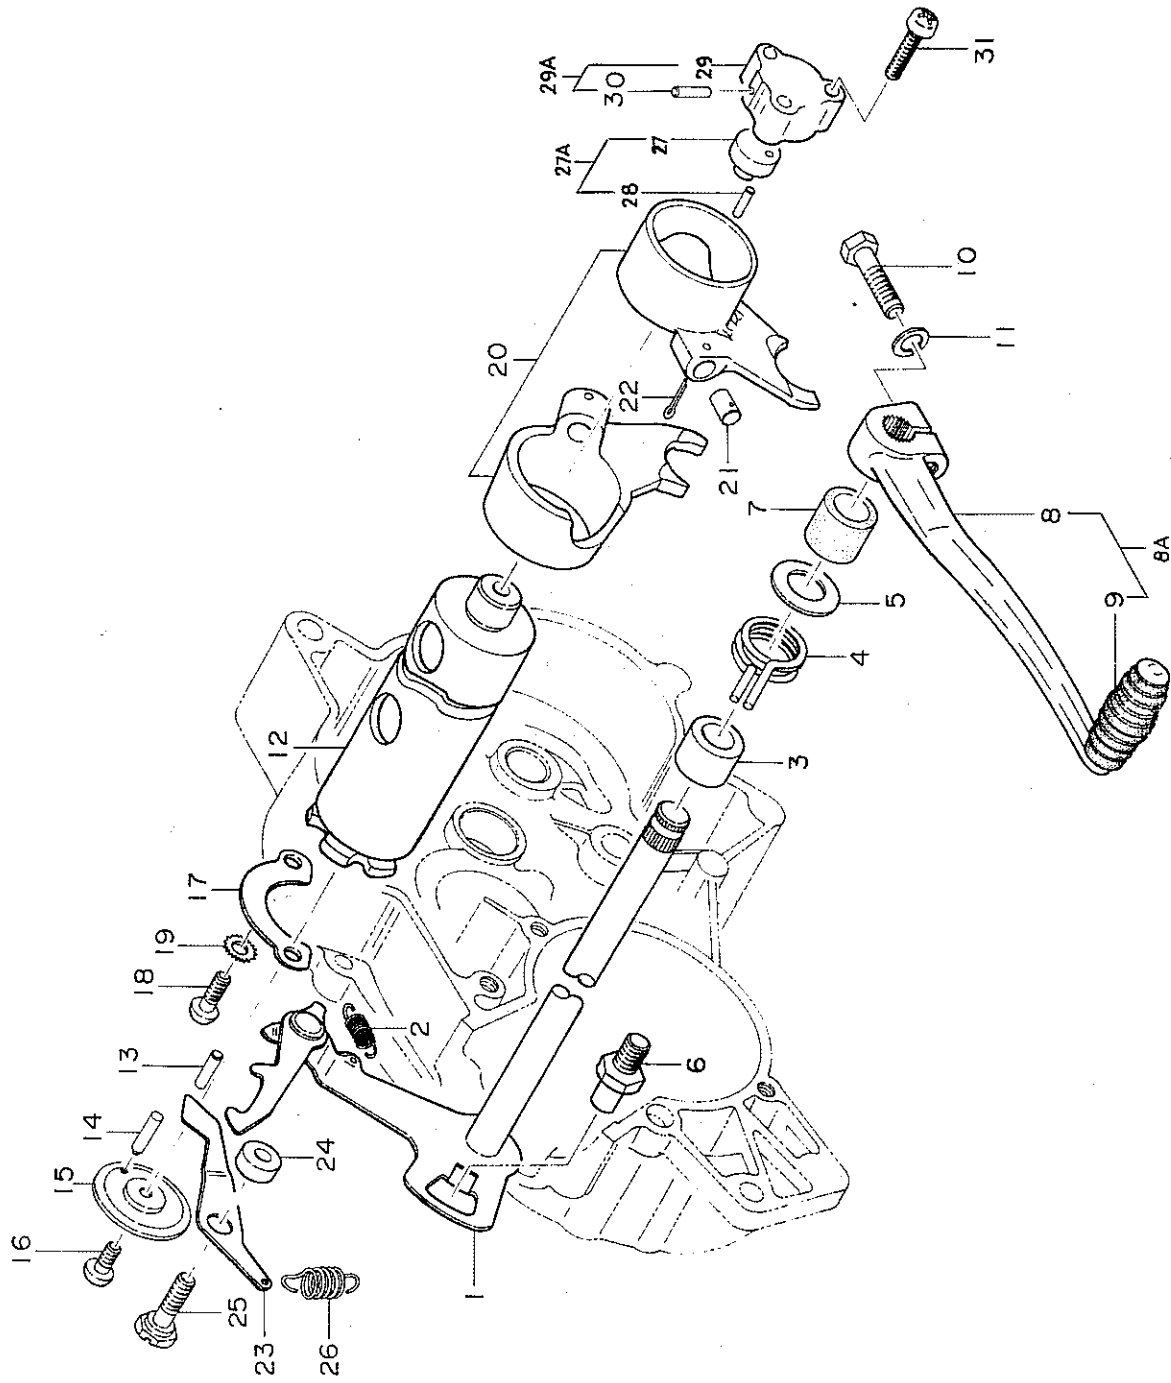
CHANGE SHAFT AND SHIFT DRUM
